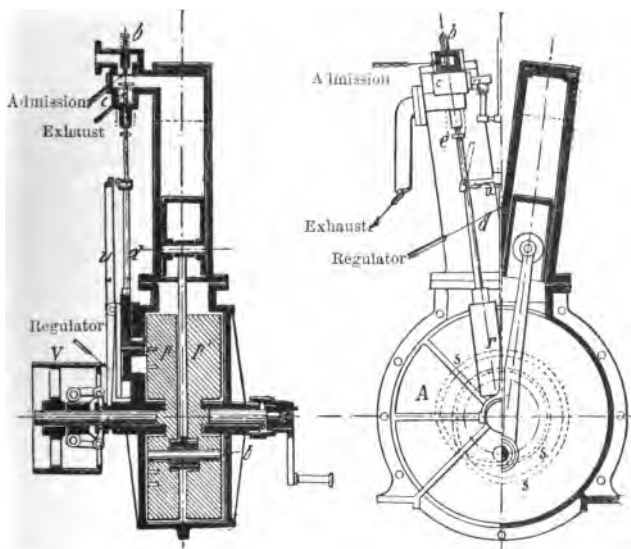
Daimler Motor applied to the Peugeot Cars.
